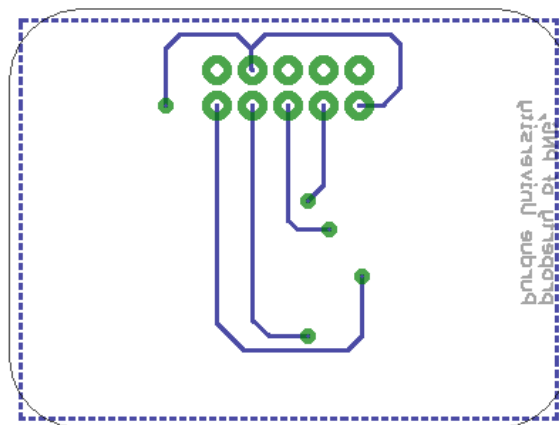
BTE\_HITS\_V03 Side Board Bottom Copper
